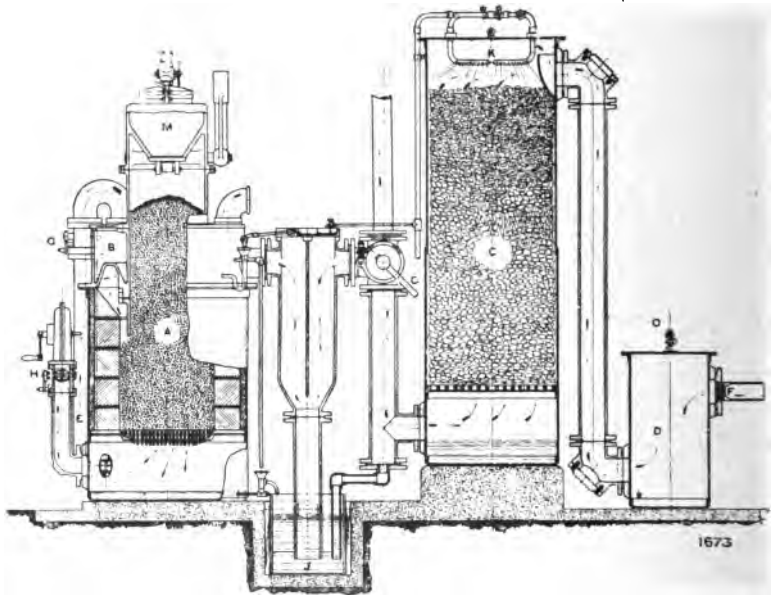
Hornsby-Stockport Suction Gas Producer.
